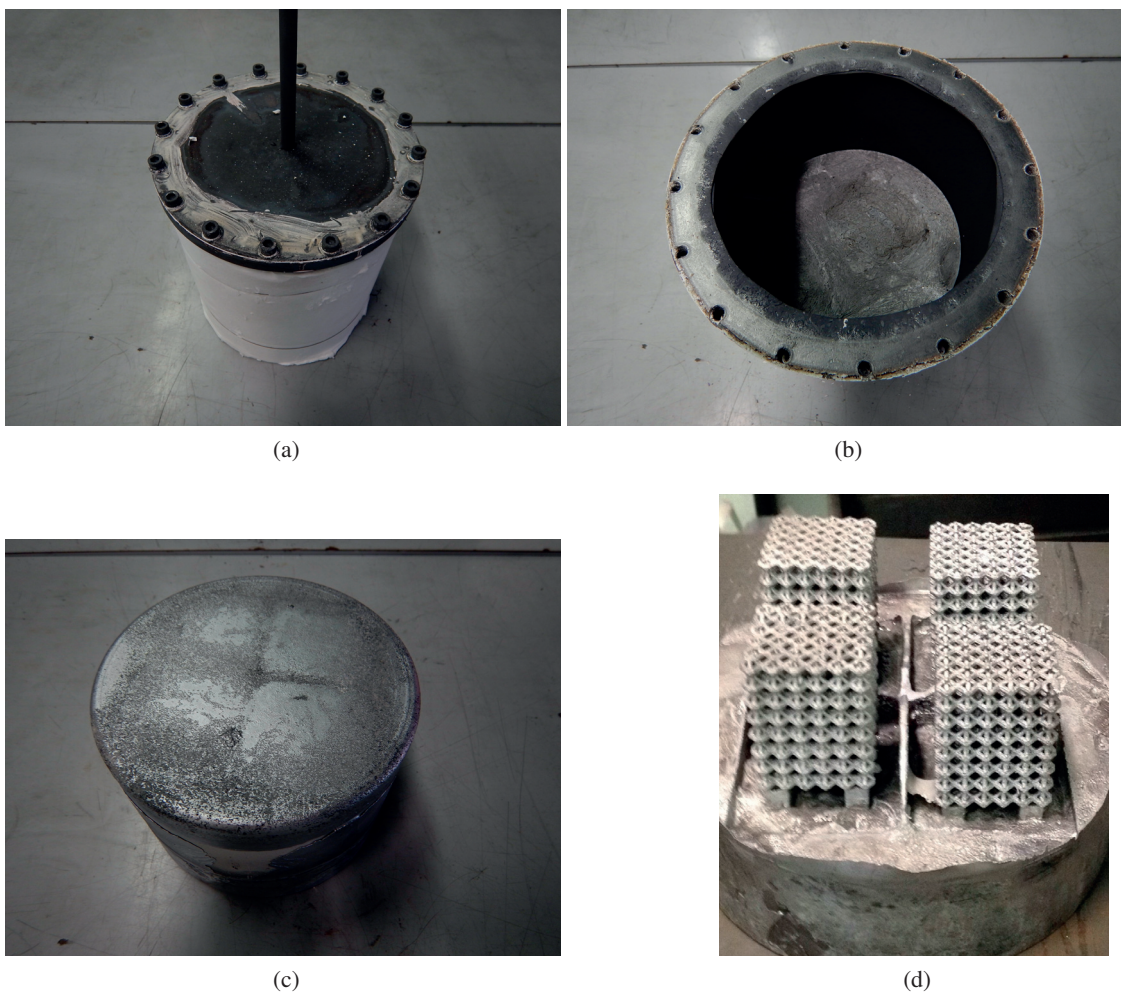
Opening of the chamber and extraction of the samples. (a) Chamber disconnected from the vacuum pump right after casting (whitish residues are thermal paste oxidation products), (b) opened chamber, (c) demolded casting and (d) samples still connected to the metal mass and gating
